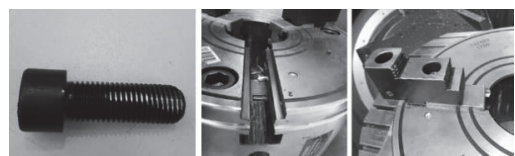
BS2i (left), shaving in chuck guides (middle) and impermissible clamping jaw position (right)
